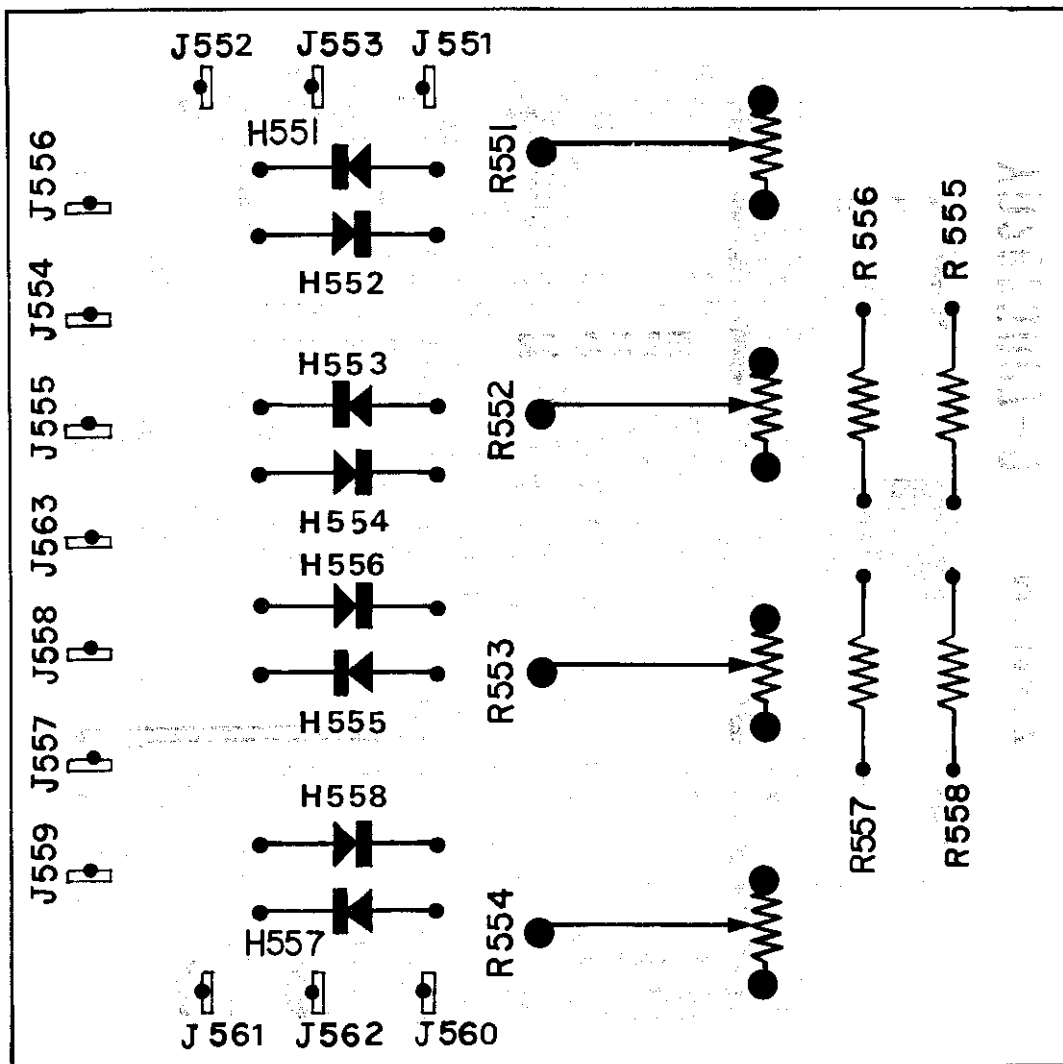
Meter Rectifier Unit Assembly P550 Component Locations
